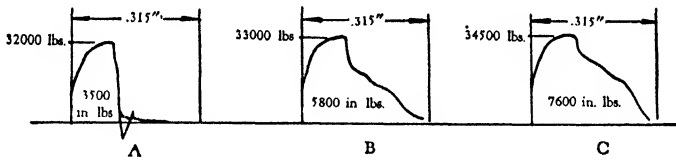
Indicator diagrams show progressive load in punching $\frac{3}{4}$ -in. holes through ductile $\frac{5}{16}$ -in. boiler-plate with (A) 10, (B) 5 and (C) 3 per cent clearance, approximately. (Anthony).
